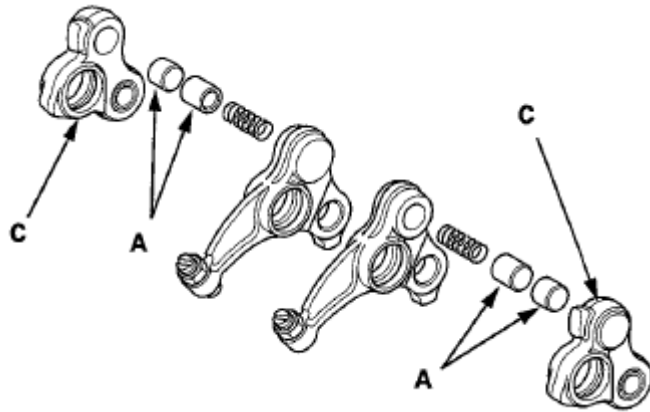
Identifying Exhaust Rocker Arm Pistons & Exhaust Primary Rocker Arms
